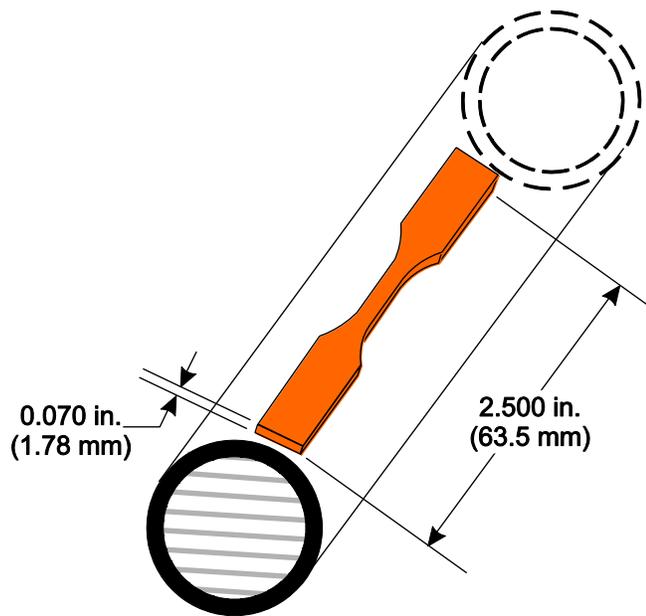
Schematic drawing for the machining direction of the Type V tensile specimen in accordance with ASTM D638 of 1 inch (25 mm) NPS CPVC pipe in accordance with ASTM F442 (units in inches)
